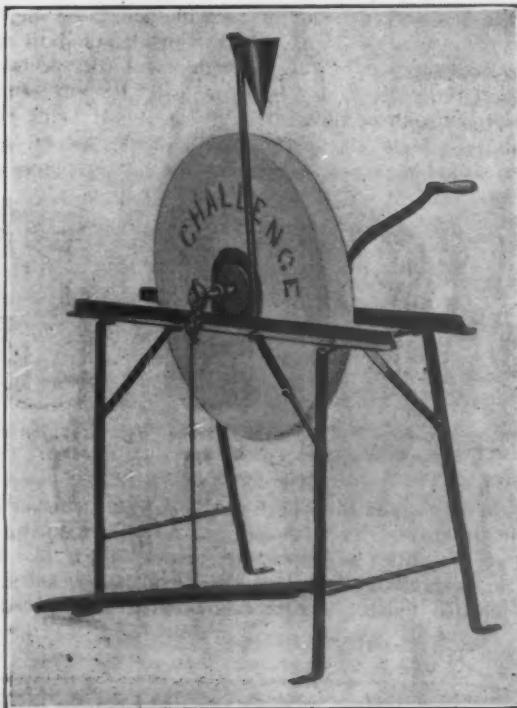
Challenge Steel Frame Ball Bearing Grindstone, No. 410.
